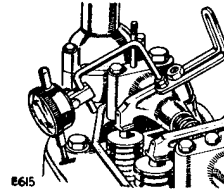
Checking No. 1 exhaust valve "fully open" position
